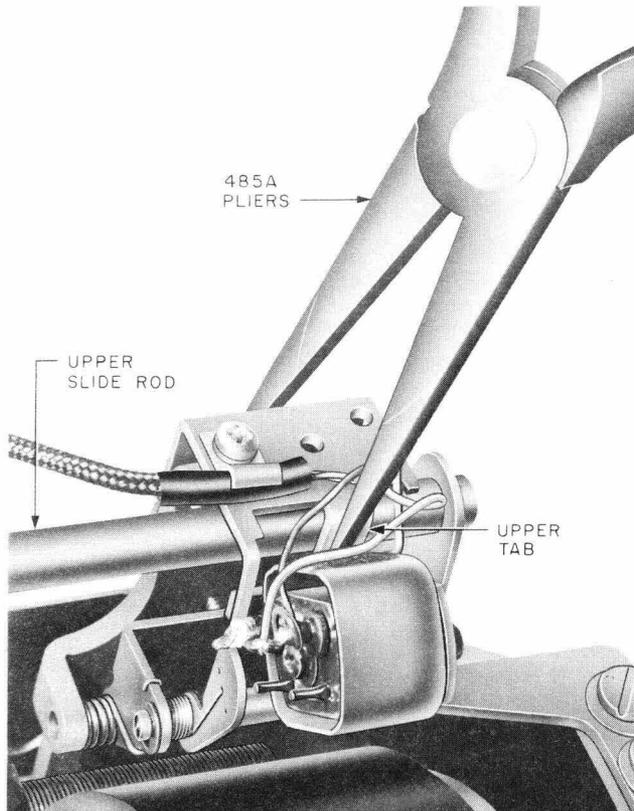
Method of Adjusting Upper Tab for Minimum Clearance
